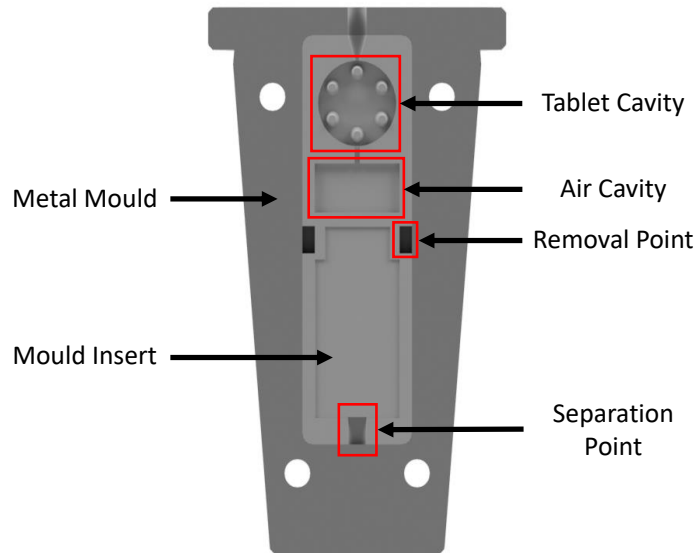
The mould insert for the 6 Pin Design inserted into the metal mould. This depiction represents one half of the full mould.
